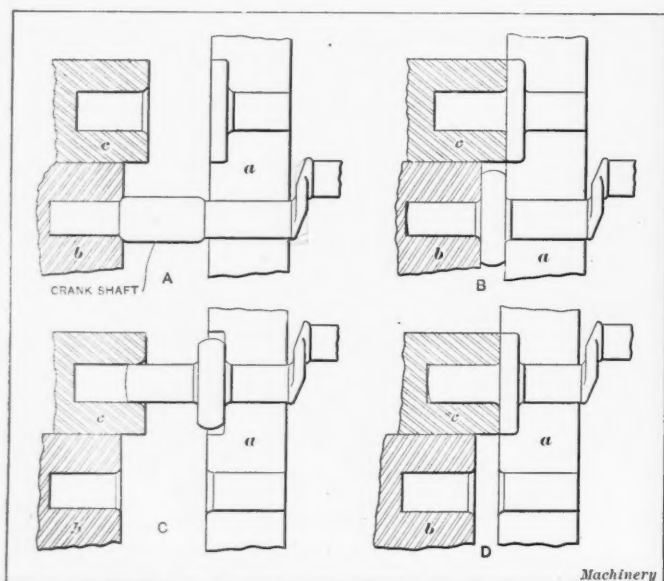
Diagram illustrating the Evolution of the Flange on the Crankshaft which is produced in a Four-inch Ajax Upsetting and Forging Machine in Two Blows
